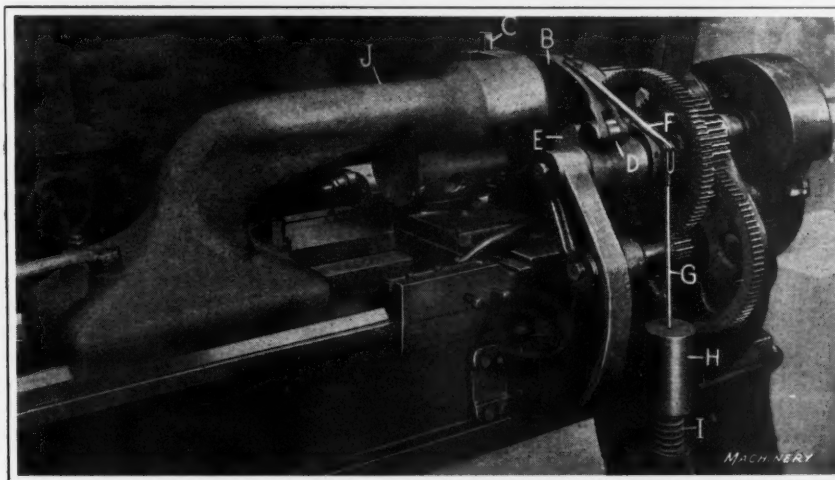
Arrangement of the Cam-actuated Mechanism of the Piston Facing Attachment
